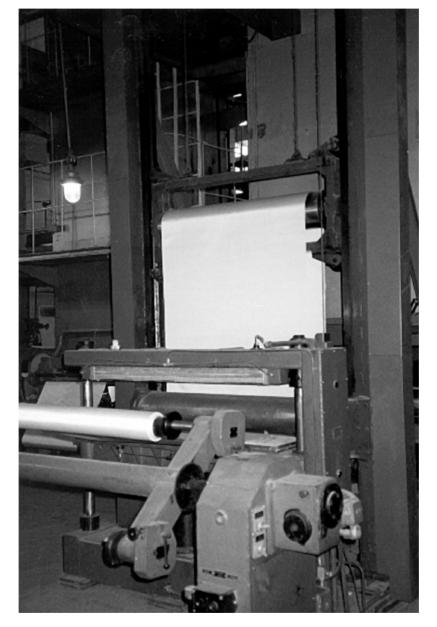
Machine making a prepreg from fiberglass fabric and epoxy resin. Courtesy of CRISM.
